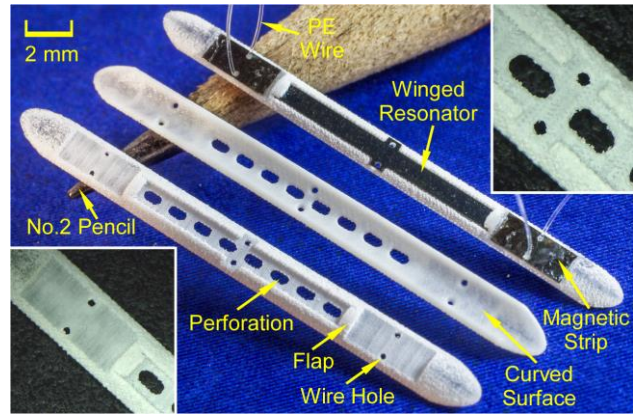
Top and back views of the 3D printed Type F package. A resonator and magnets integrated with the package is also shown. The insets show details near the flap (bottom left) and the center perforations (top right).
